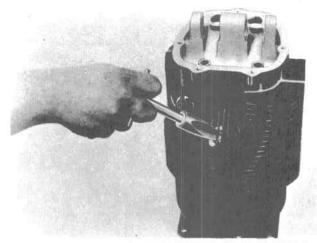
C. REMOVING SPARK PLUG HOLE HELICAL INSERT.
